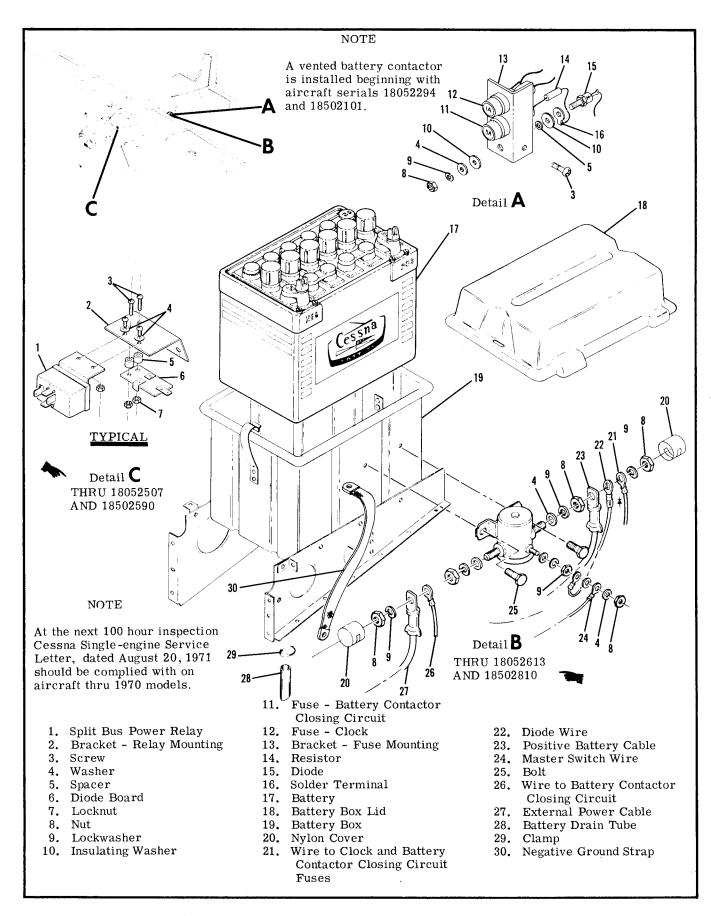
Battery and Electrical Equipment Installation (Sheet 1 of 2)
